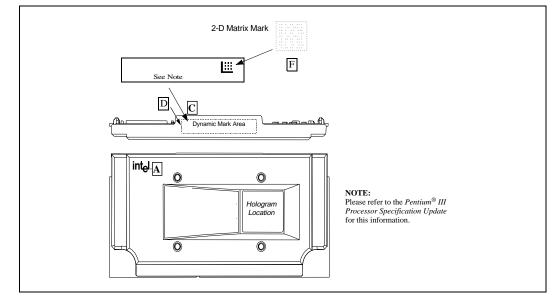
Pentium[®] III Processor Markings (S.E.C.C.2 Package)
